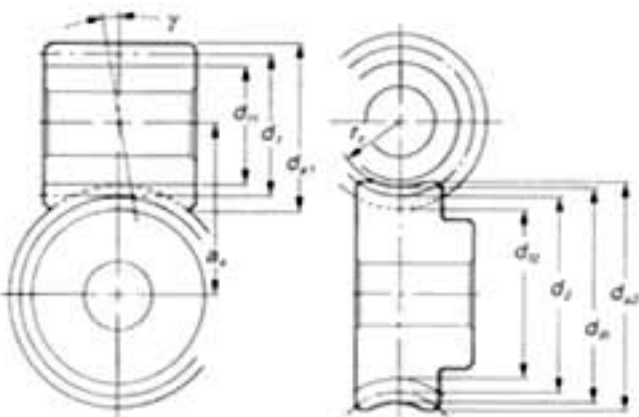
Dimensions of Cylindrical Worm Gears
